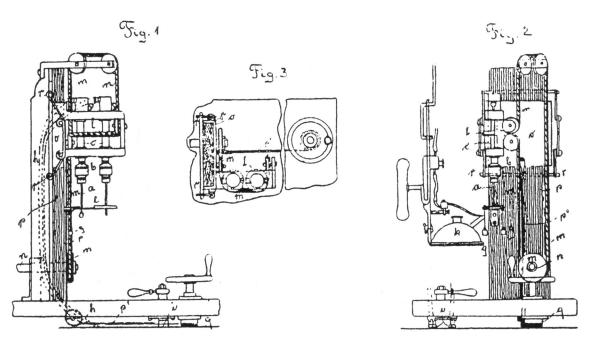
Machine for making hollow-glass beads (Jossand method) (Parkert 1925:156, Figure 36).
